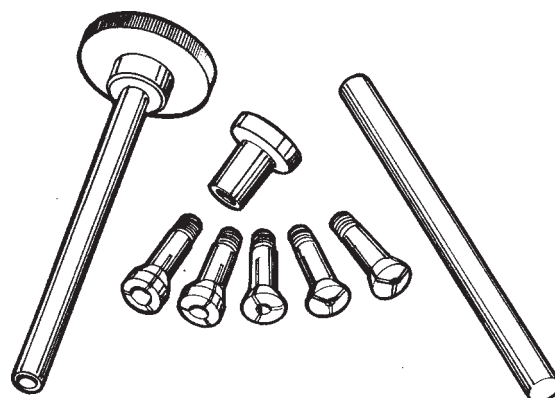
Collet Set with Drawbar, Adapter and Knock-out Bar (P/N 1160, American-- P/N 1178, Metric).
